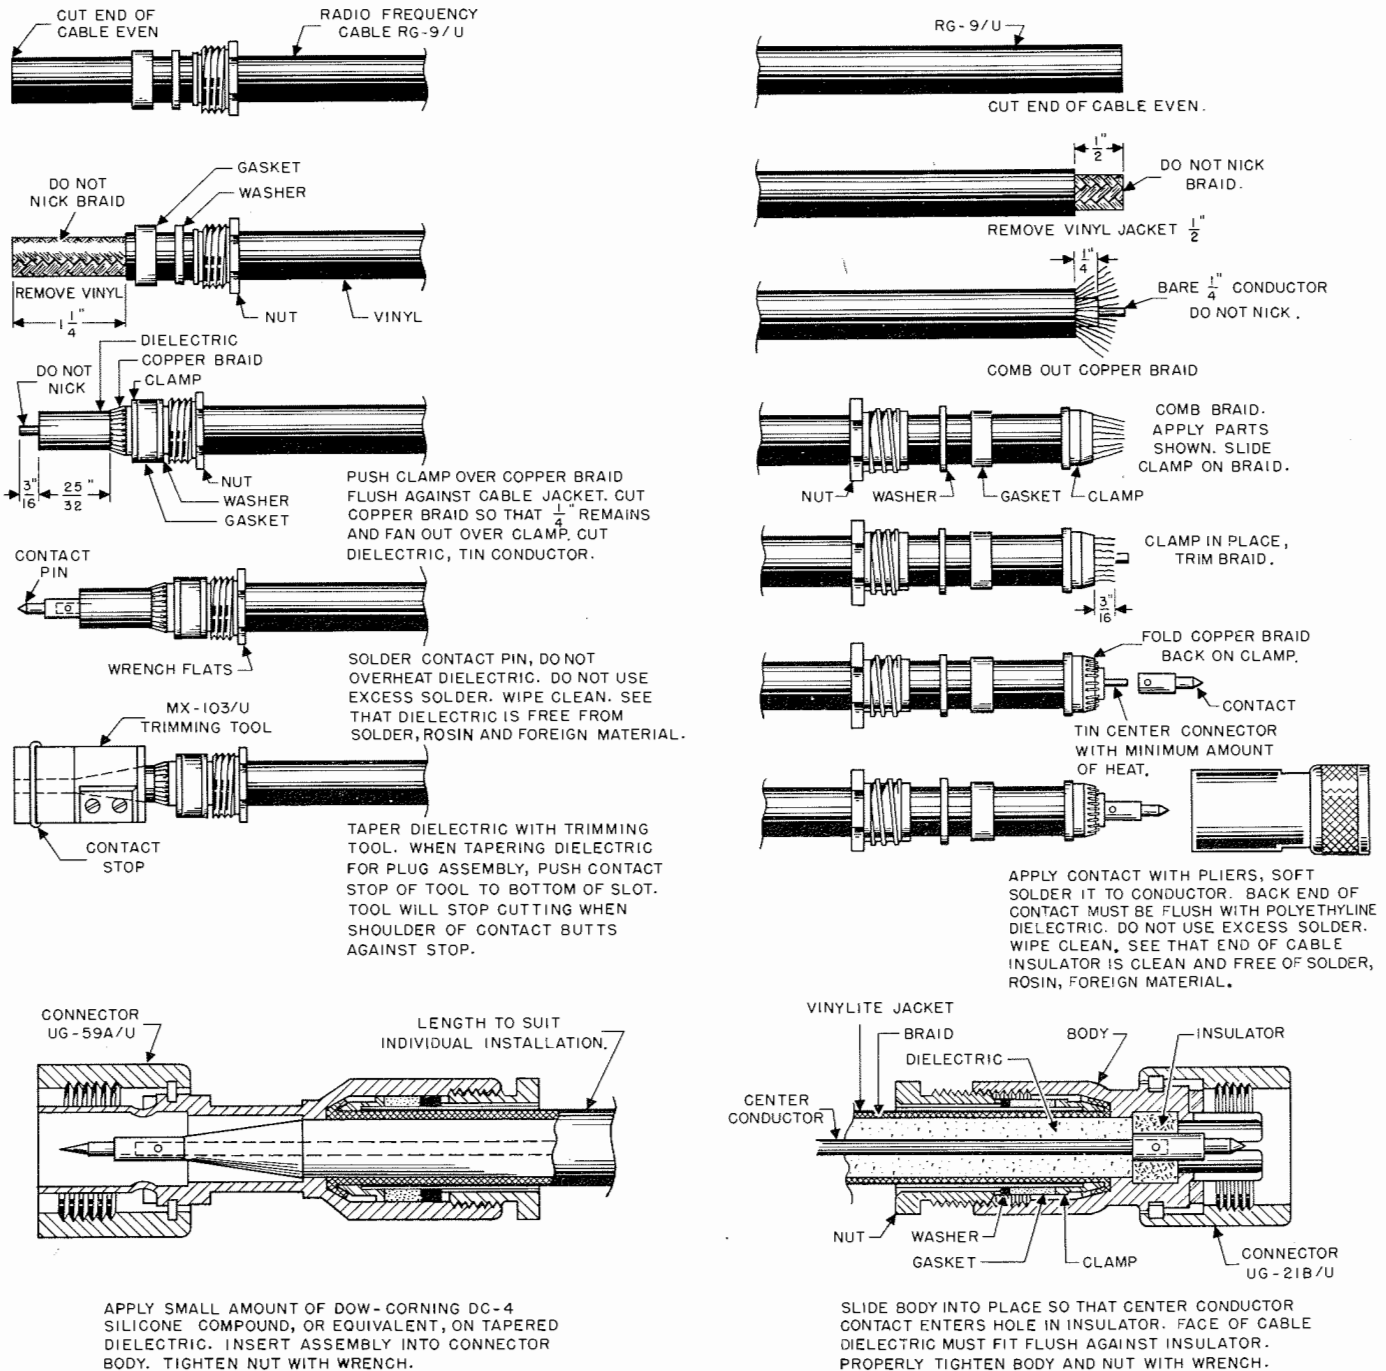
Antenna Transfer Cable Assembly, Fabrication
